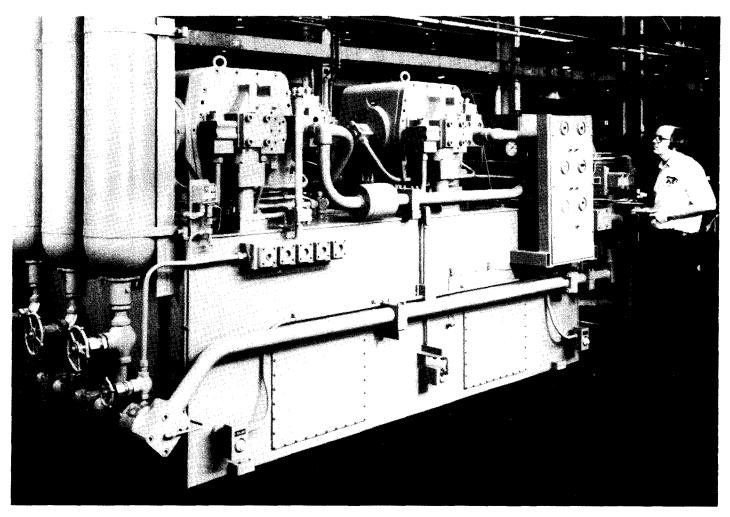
Pump/Motor Base w/Two (2) "DN-M" Pumps and Accessory Equipment Used to Operate Hydrostatic Pipe Tester. (55341)
